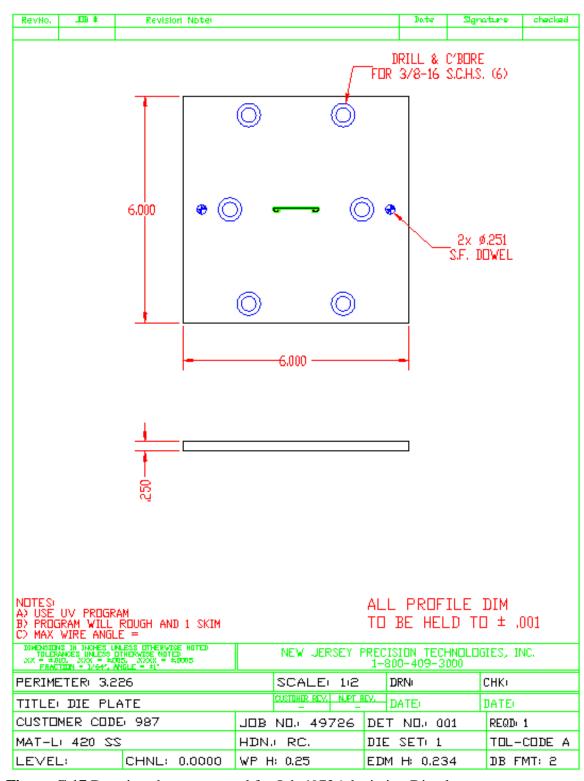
Drawing sheet generated for Job 49726 depicting Die plate.
